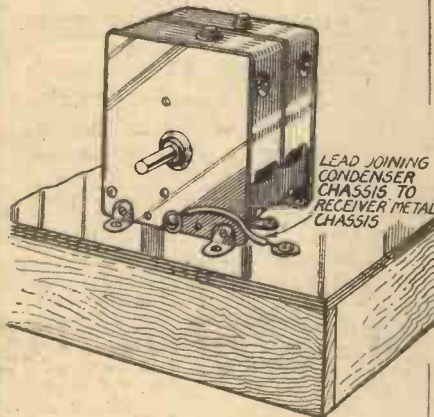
Condenser chassis joined to metallised surface of receiver chassis.
